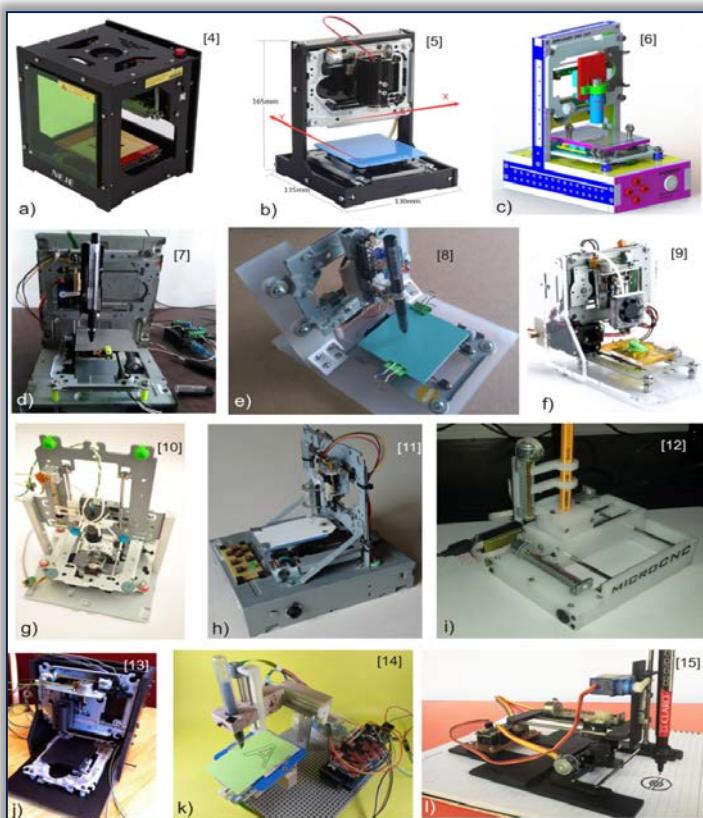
Mini CNC machine tools based on CD/DVD drive hardware [4–15]
